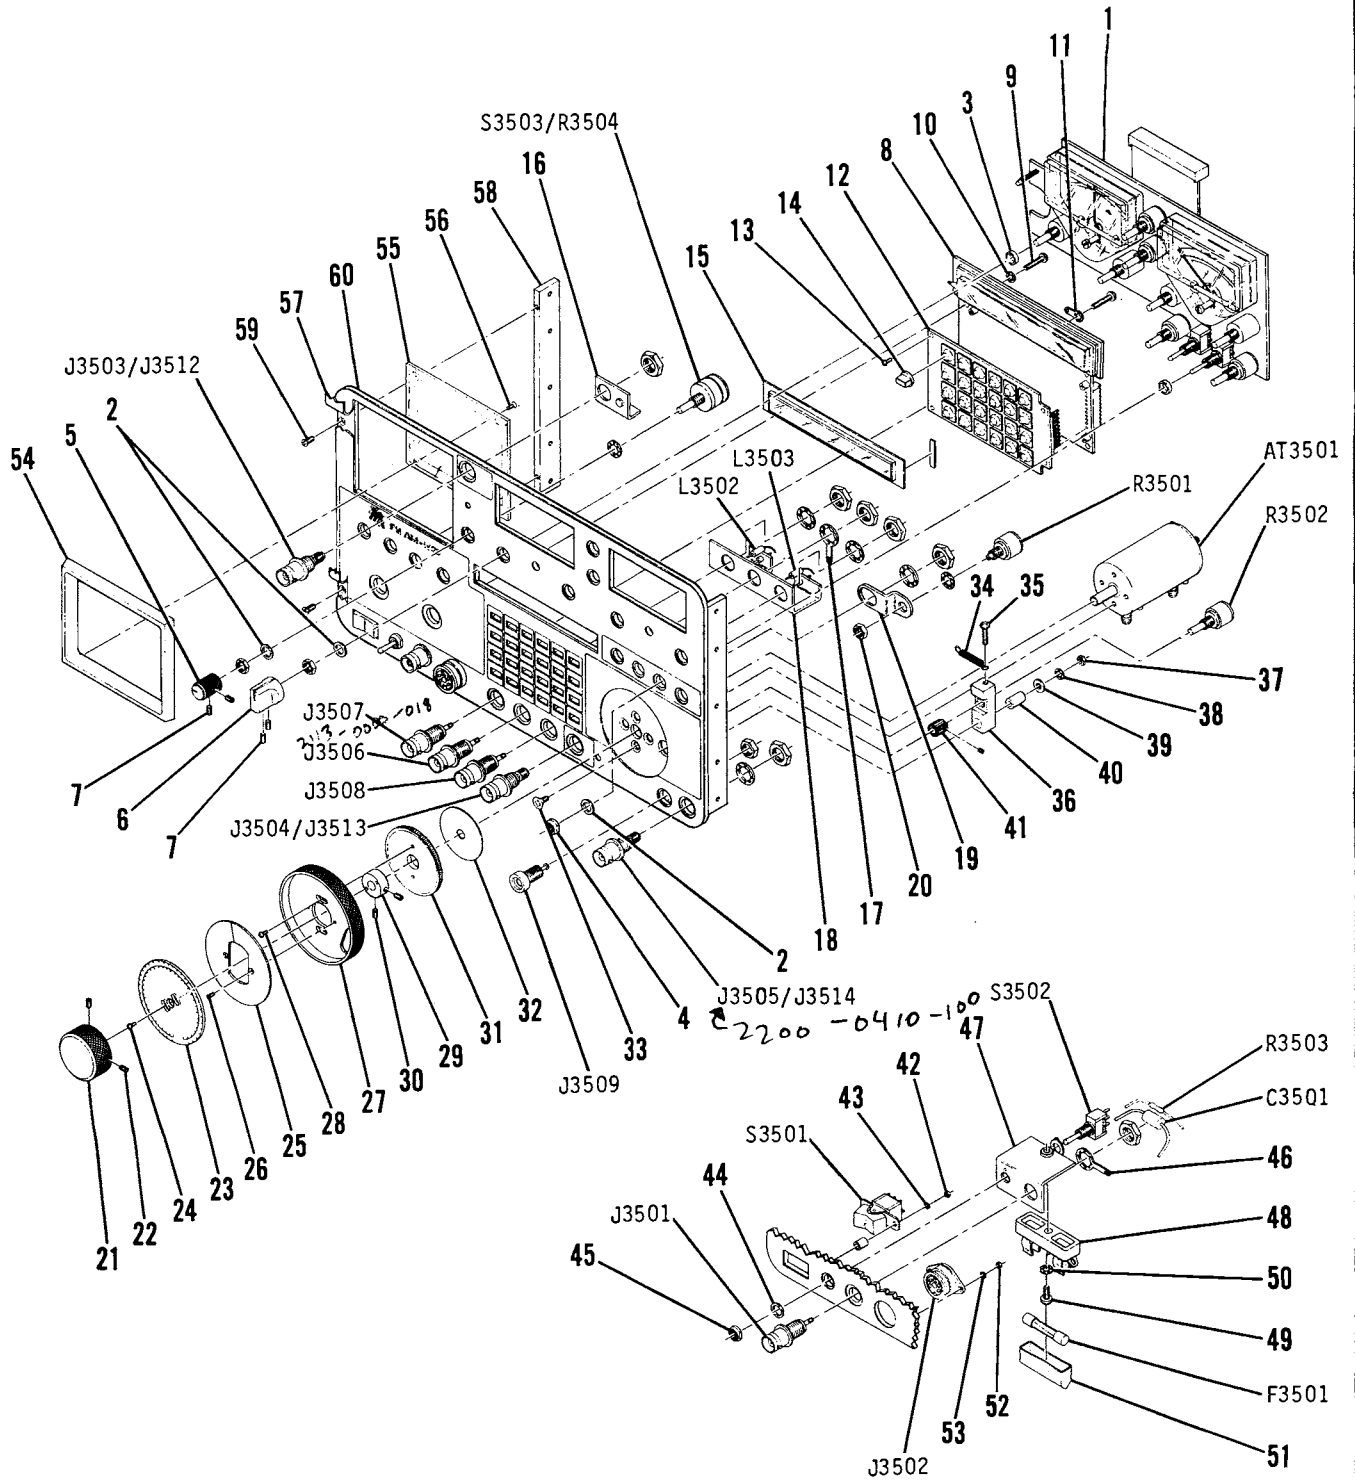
FRONT PANEL ASSEMBLY (SHEET 2 OF 2)
